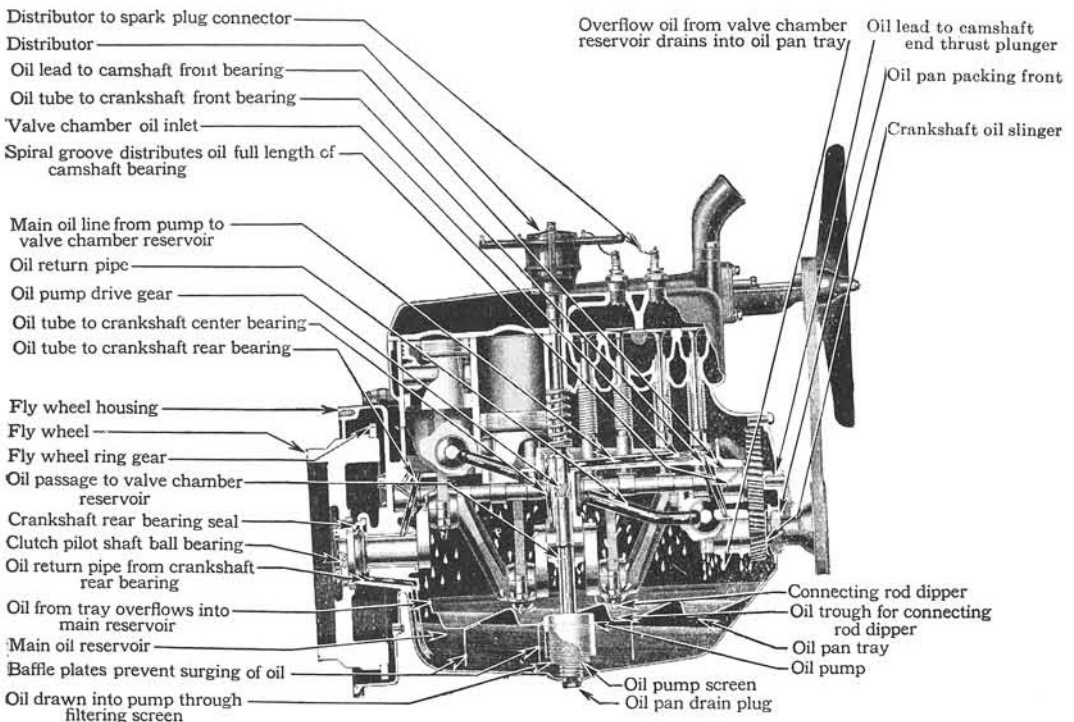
Engine lubrication system, Ford model "A." Engine rests in chassis on a 3 degree angle, sloping to the rear which gives a more direct drive to the rear axle eliminating friction and wear to a great extent.
